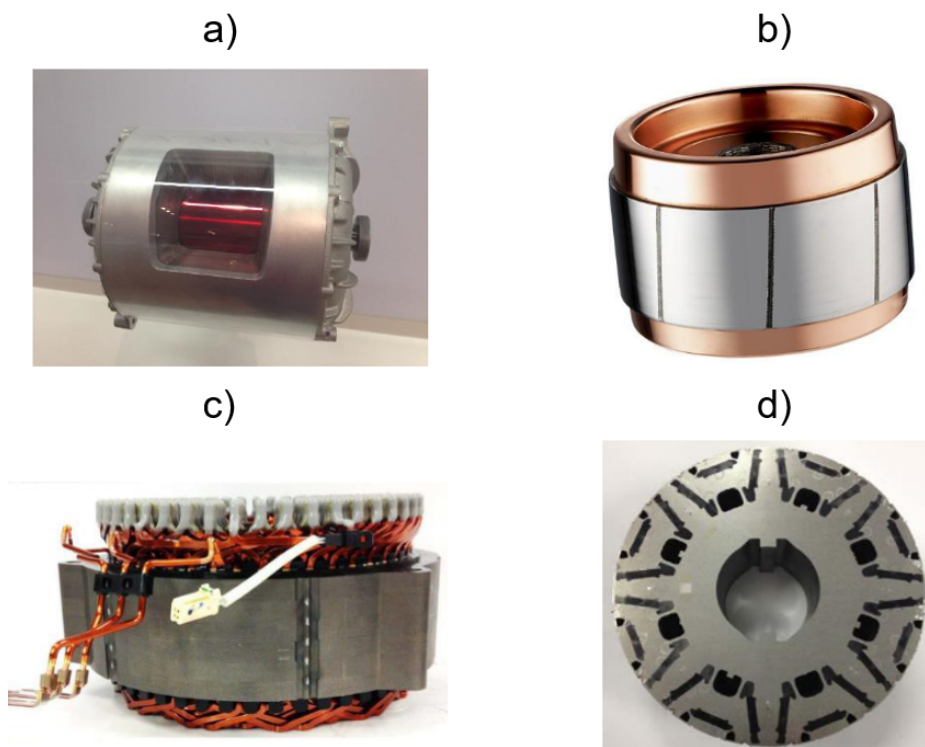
EM components. a) Tesla IM cut-out, b) die-cast copper rotor for IM, c) Stator distributed winding design in Prius 2017 and d) Rotor design of the interior permanent magnet (IPM) machine in Prius 2017 [77].
